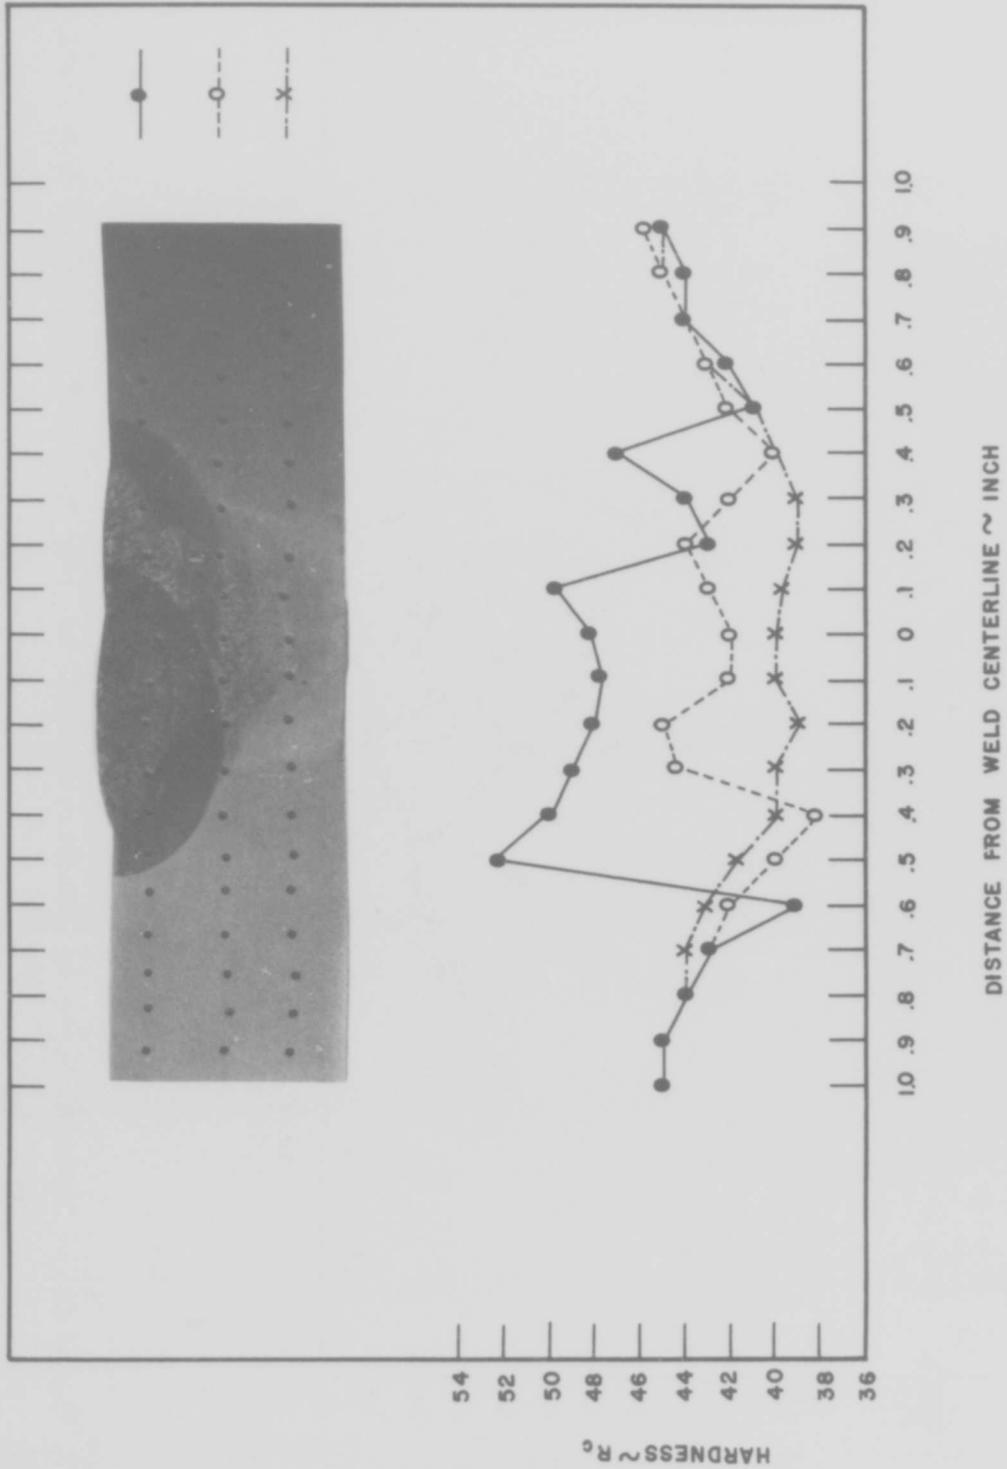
Hardness Survey of Multipass TIG Weld No. 0271 Made in HP 9-4-45 1/2-Inch Plate Using a 440°F Pre- and Post-Heat.
